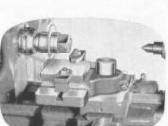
At Right-Milling a Dovetail in Milling Attachment.
